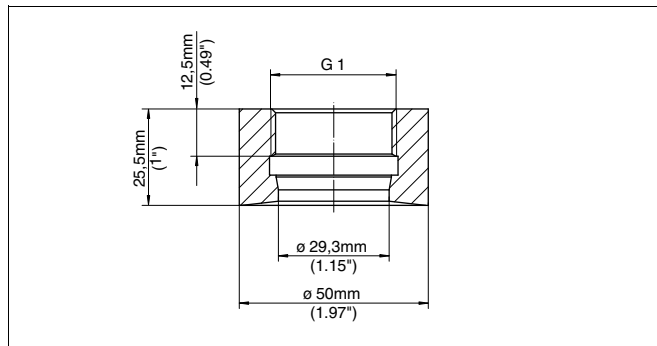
Dimensions welded socket G1 aseptic
